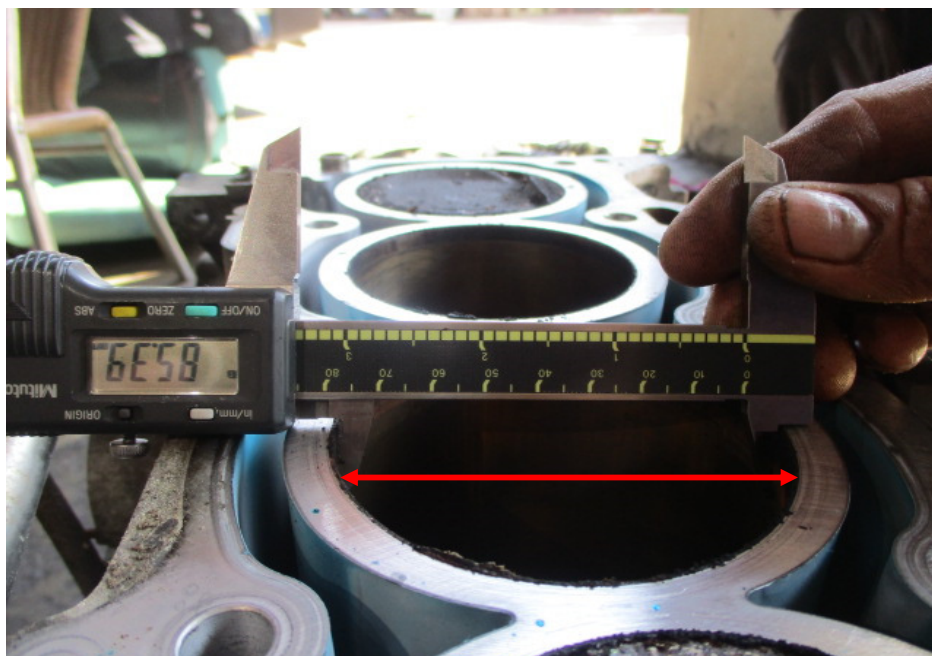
shows measurement being carried out to the stroke of cylinder 2 of the Toyota engine that I had inspected.
